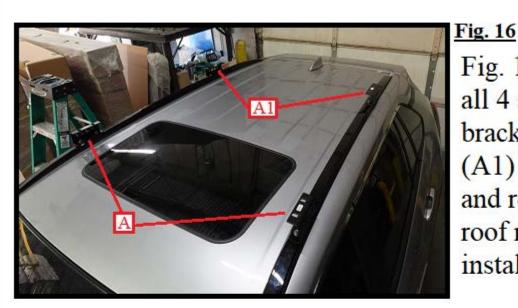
, shows all 4 support brackets (A) and (A1) installed and ready for roof rack installation.
